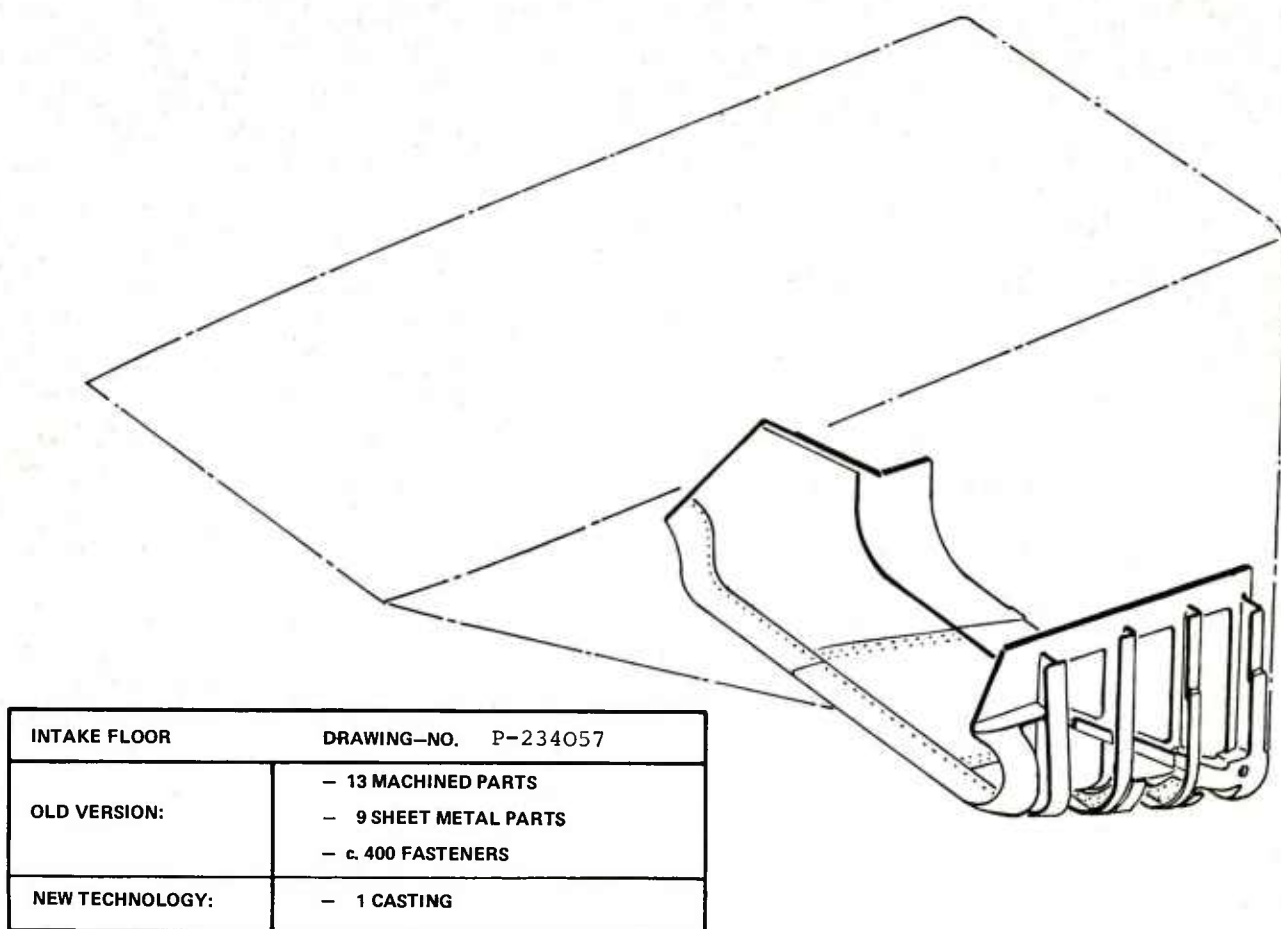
Exemplary component: MRCA Tornado INTAKE FLOOR
